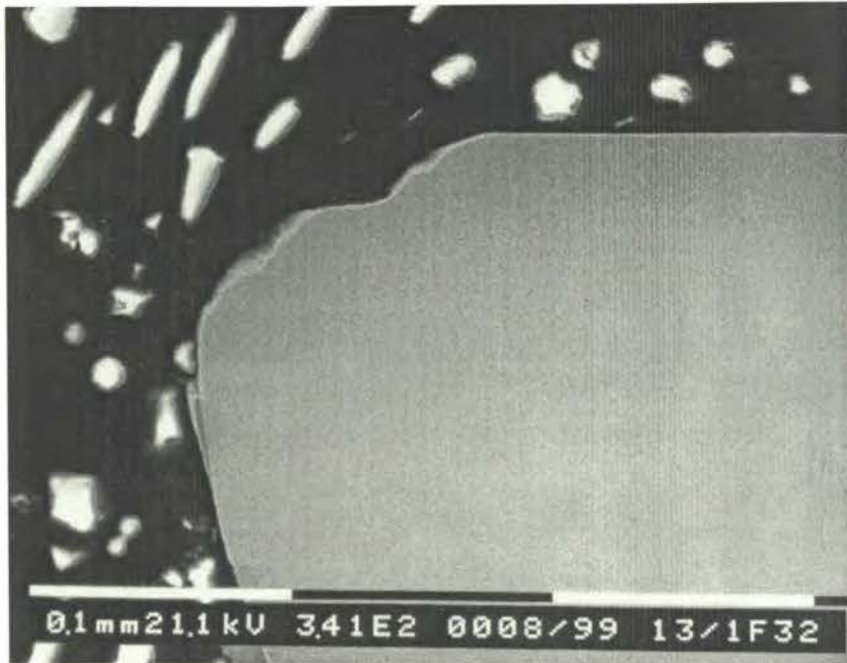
35 Sectioned KMF tool showing chipped cutting edge and adhered workpiece and smooth wear on the flank face, after cutting Inconel 718 for 32 minutes at 25 m/min and 0.08 mm/tooth
